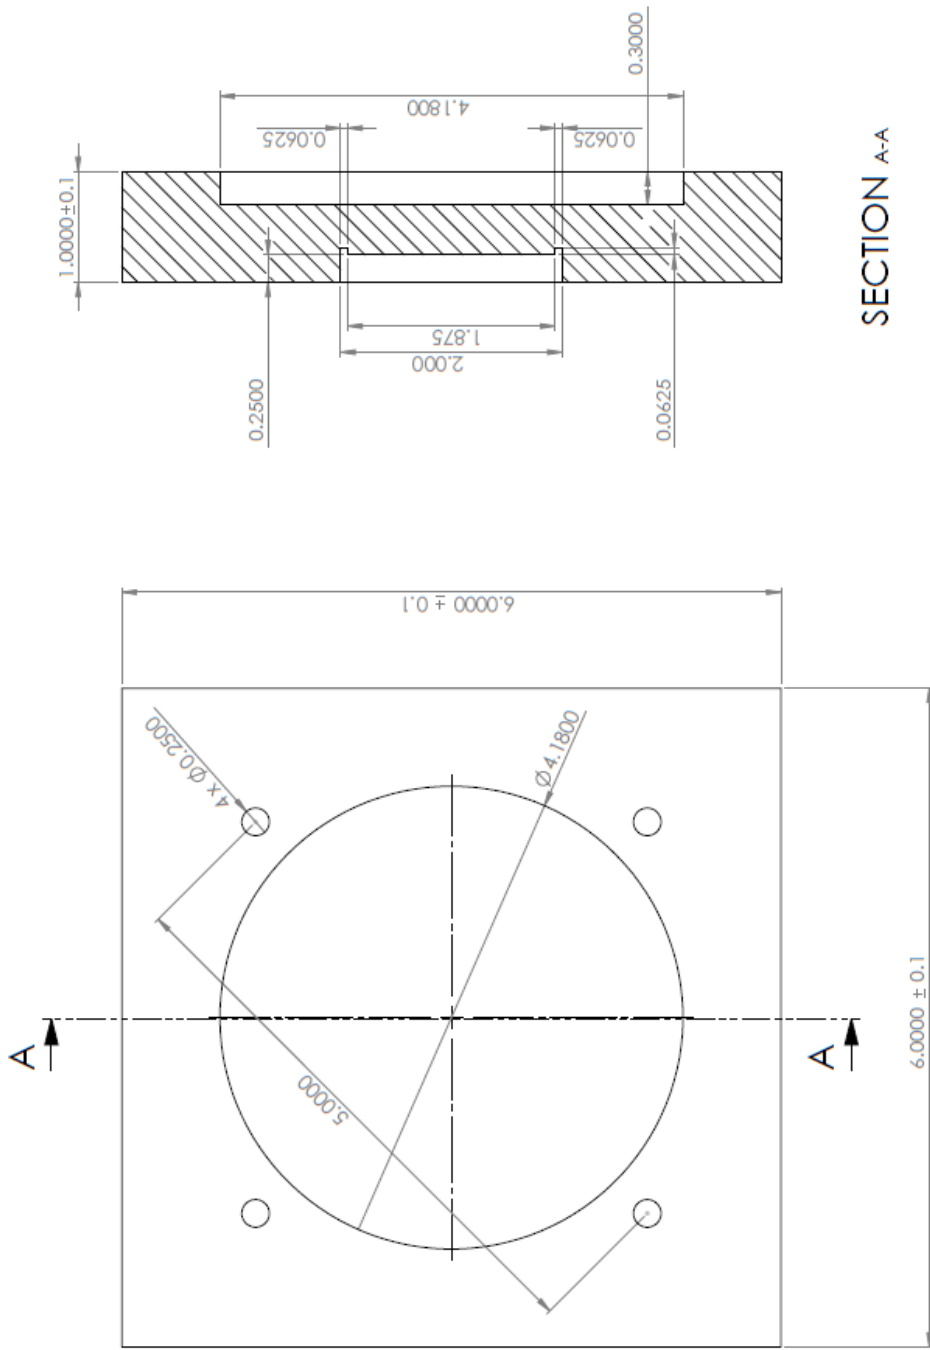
Engineering drawings of the bottom block of the Taylor-Couette cell. All dimensions are shown in inches.
